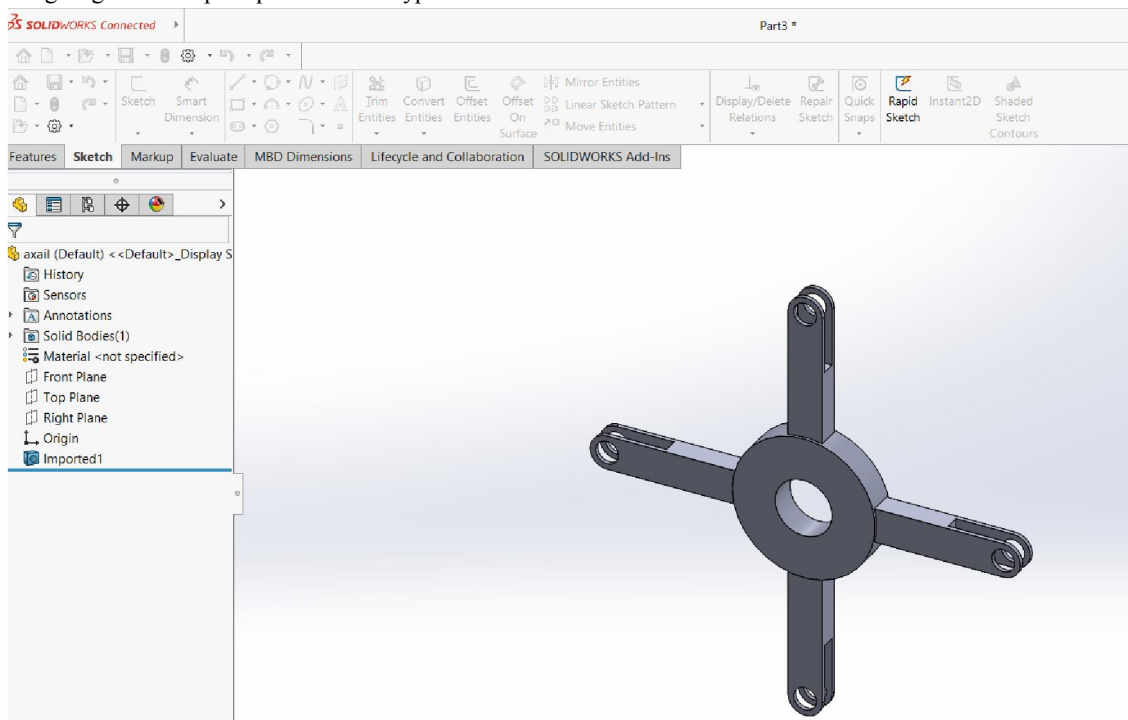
Step 1: - to prepare wheel component (wheel 2 case 2)
